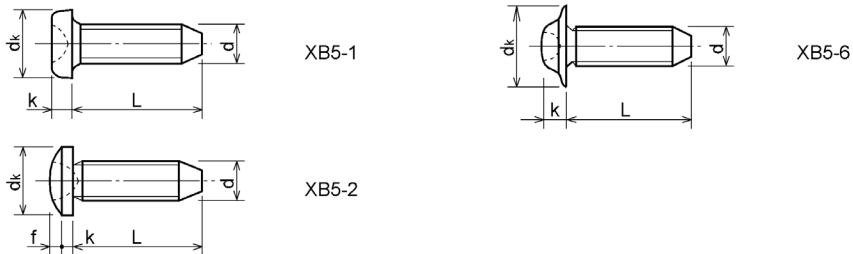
/7) MECHANICAL STANDARD PARTS (SCREWS)
